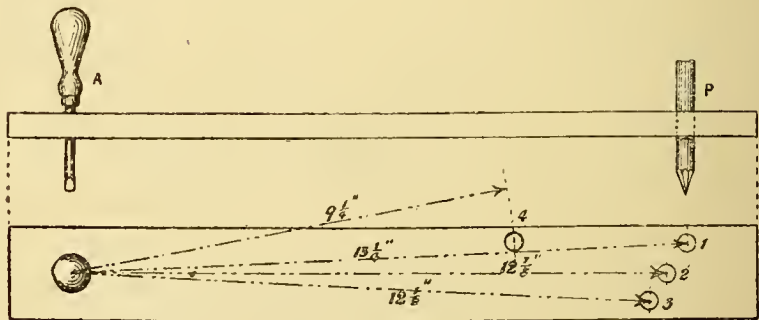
TRAMMEL FOR STRIKING OUT SEGMENTS. One-fourth full size.
